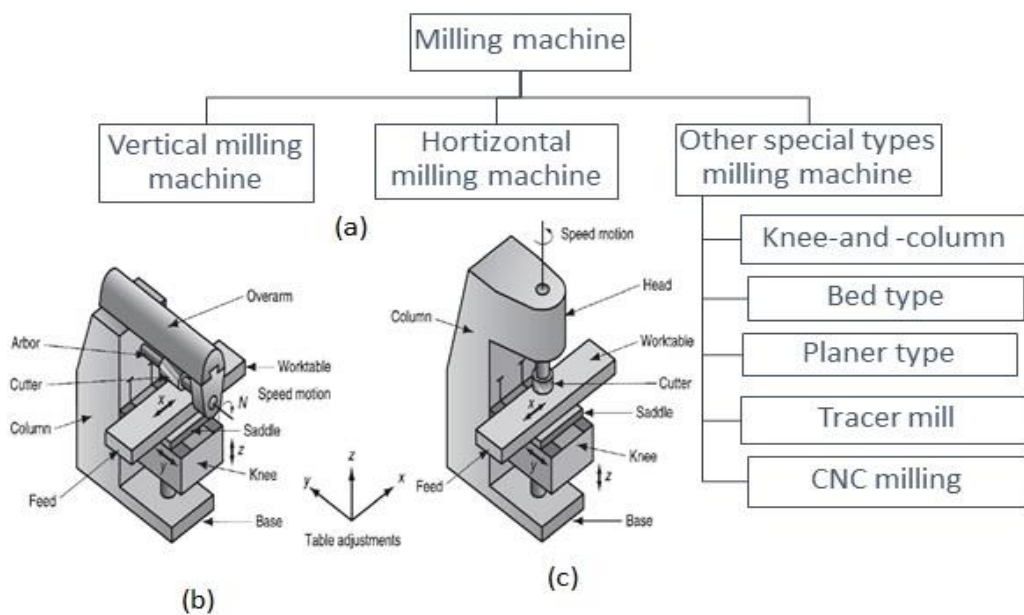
(a) classification of milling machine based on spindle rotation (b) horizontal milling machine (c) vertical milling machine [10].
